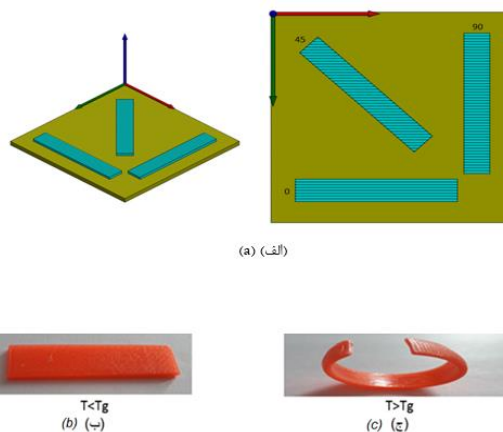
(a) printing pattern for different angles, (b) printed specimen, (c) stimulated specimen
